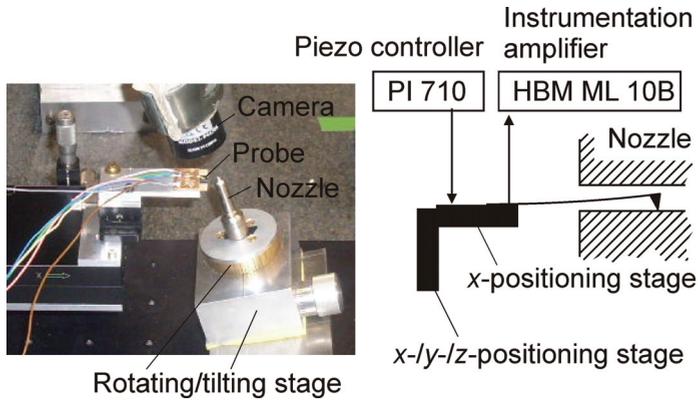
Photograph (left) and schematic (right) of a setup for surface scanning inside spray holes of DI nozzles.
